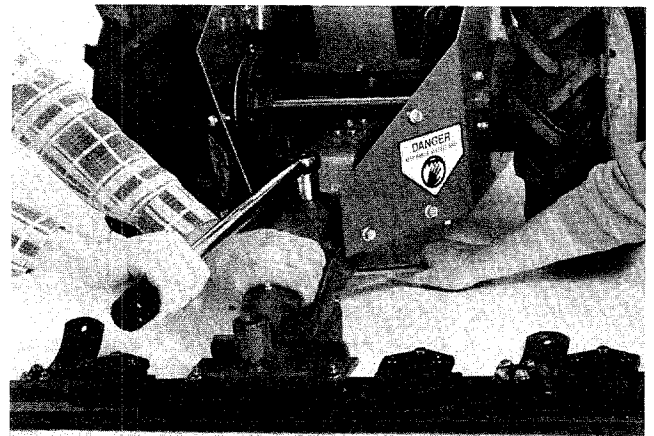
A: Torqueing the nut on the drive arm pivot bolt.
